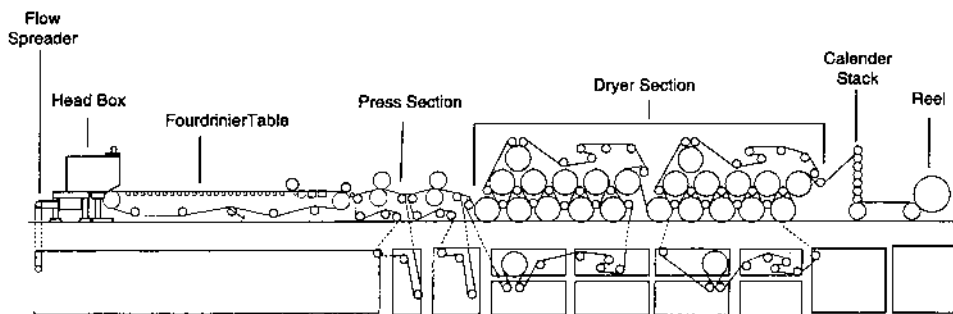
Fourdrinier paper machine. (From Ref. 4.)
